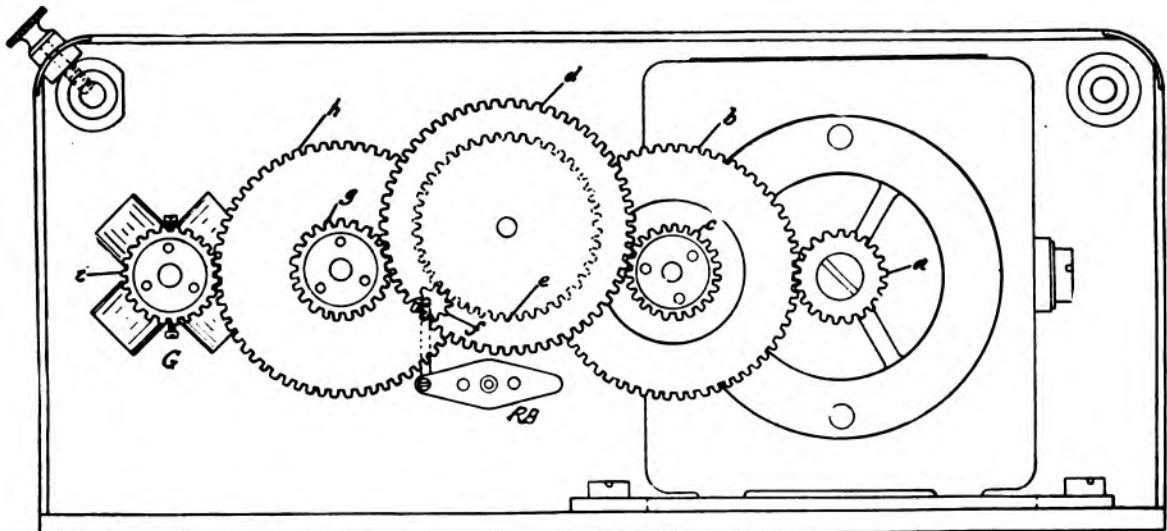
TRANSMITTER DRIVING MECHANISM.
